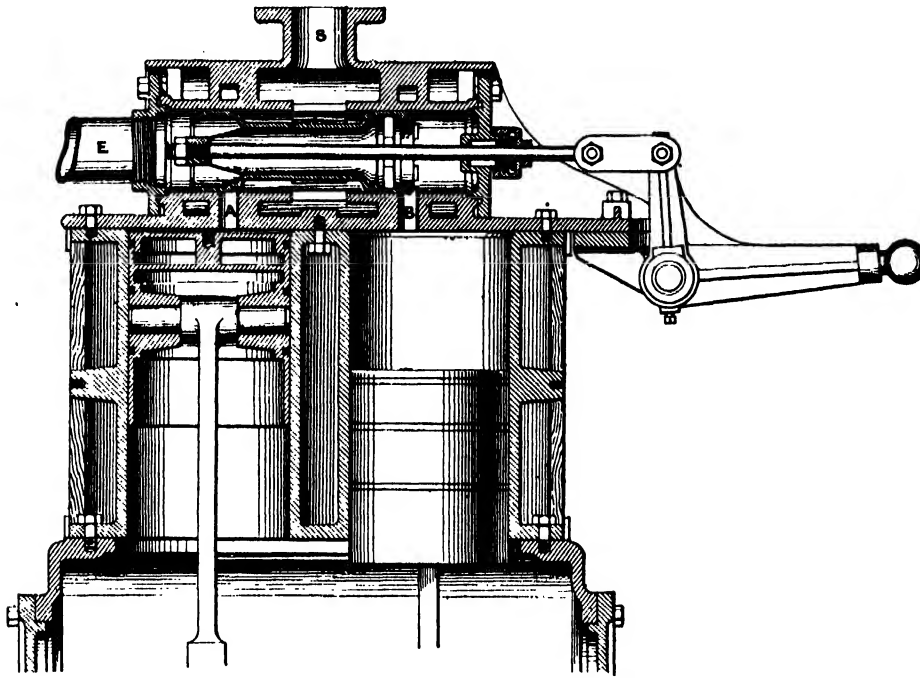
Section of Westinghouse Engine showing Arrangement of Piston Valve
